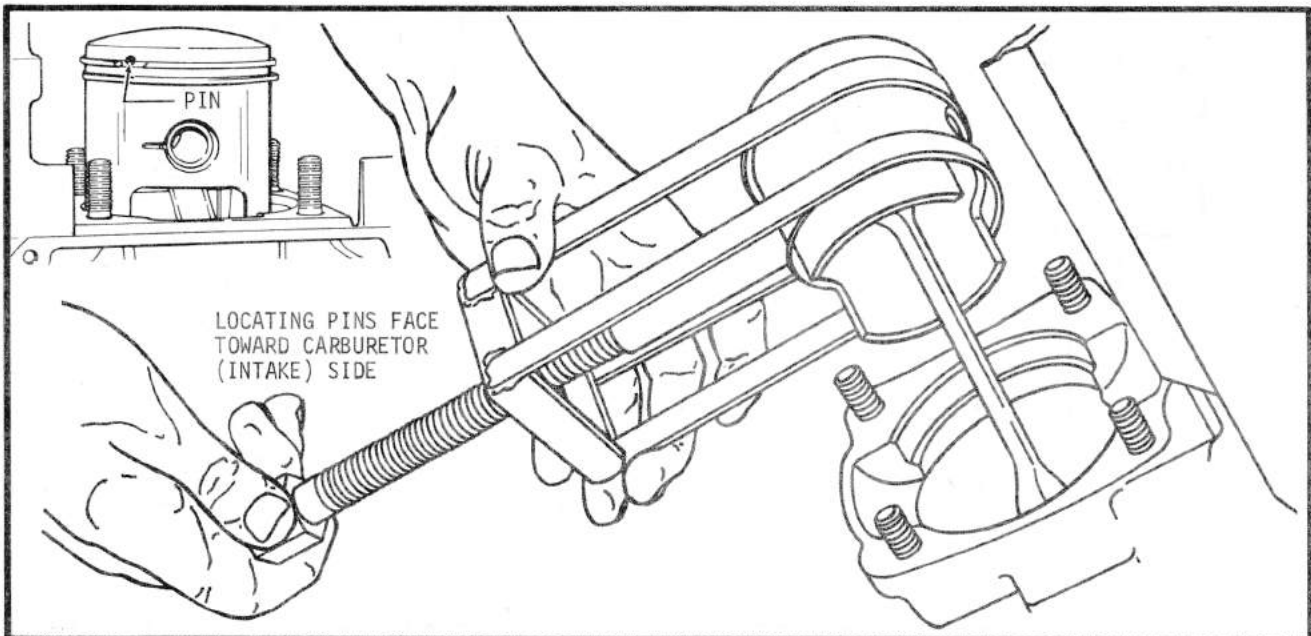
USING EXTRACTOR TOOL TO INSTALL PISTON PIN
